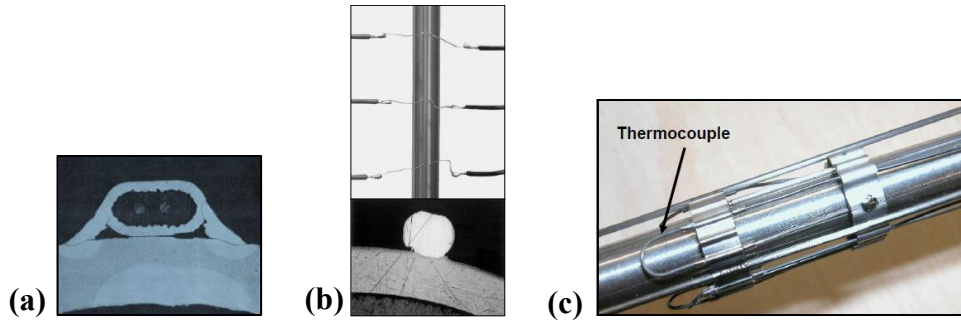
Examples of thermocouple-cladding attachment for various in-pile transient testing facilities. (a) Zr-sheathed, custom thermocouple laser welded to Zry cladding developed as part of the PBF/LOFT programs used in flowing water environments; (b) Thermocouples spot welded to cladding at the NSRR facility, similar design as the SPERT CDC program; (c) thermocouple clip design used in the CABRI RIA experiments, the bands press the tip of the sheathed thermocouples to the cladding surface using a ZrO₂ insulator between the clip and the thermocouple.
